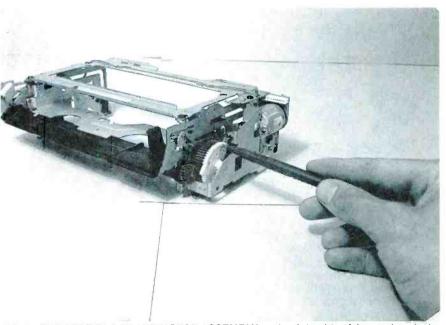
THE GEAR BLOCK AND MOTOR ASSEMBLY on the right side of the carriage is the drive system that accepts the cassette into a front-loading VCR.
